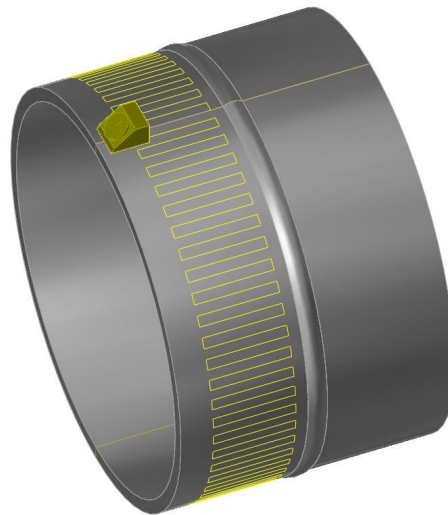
Weld inspection design in 2D CAD module and a scan pattern for the inspection simulation.
